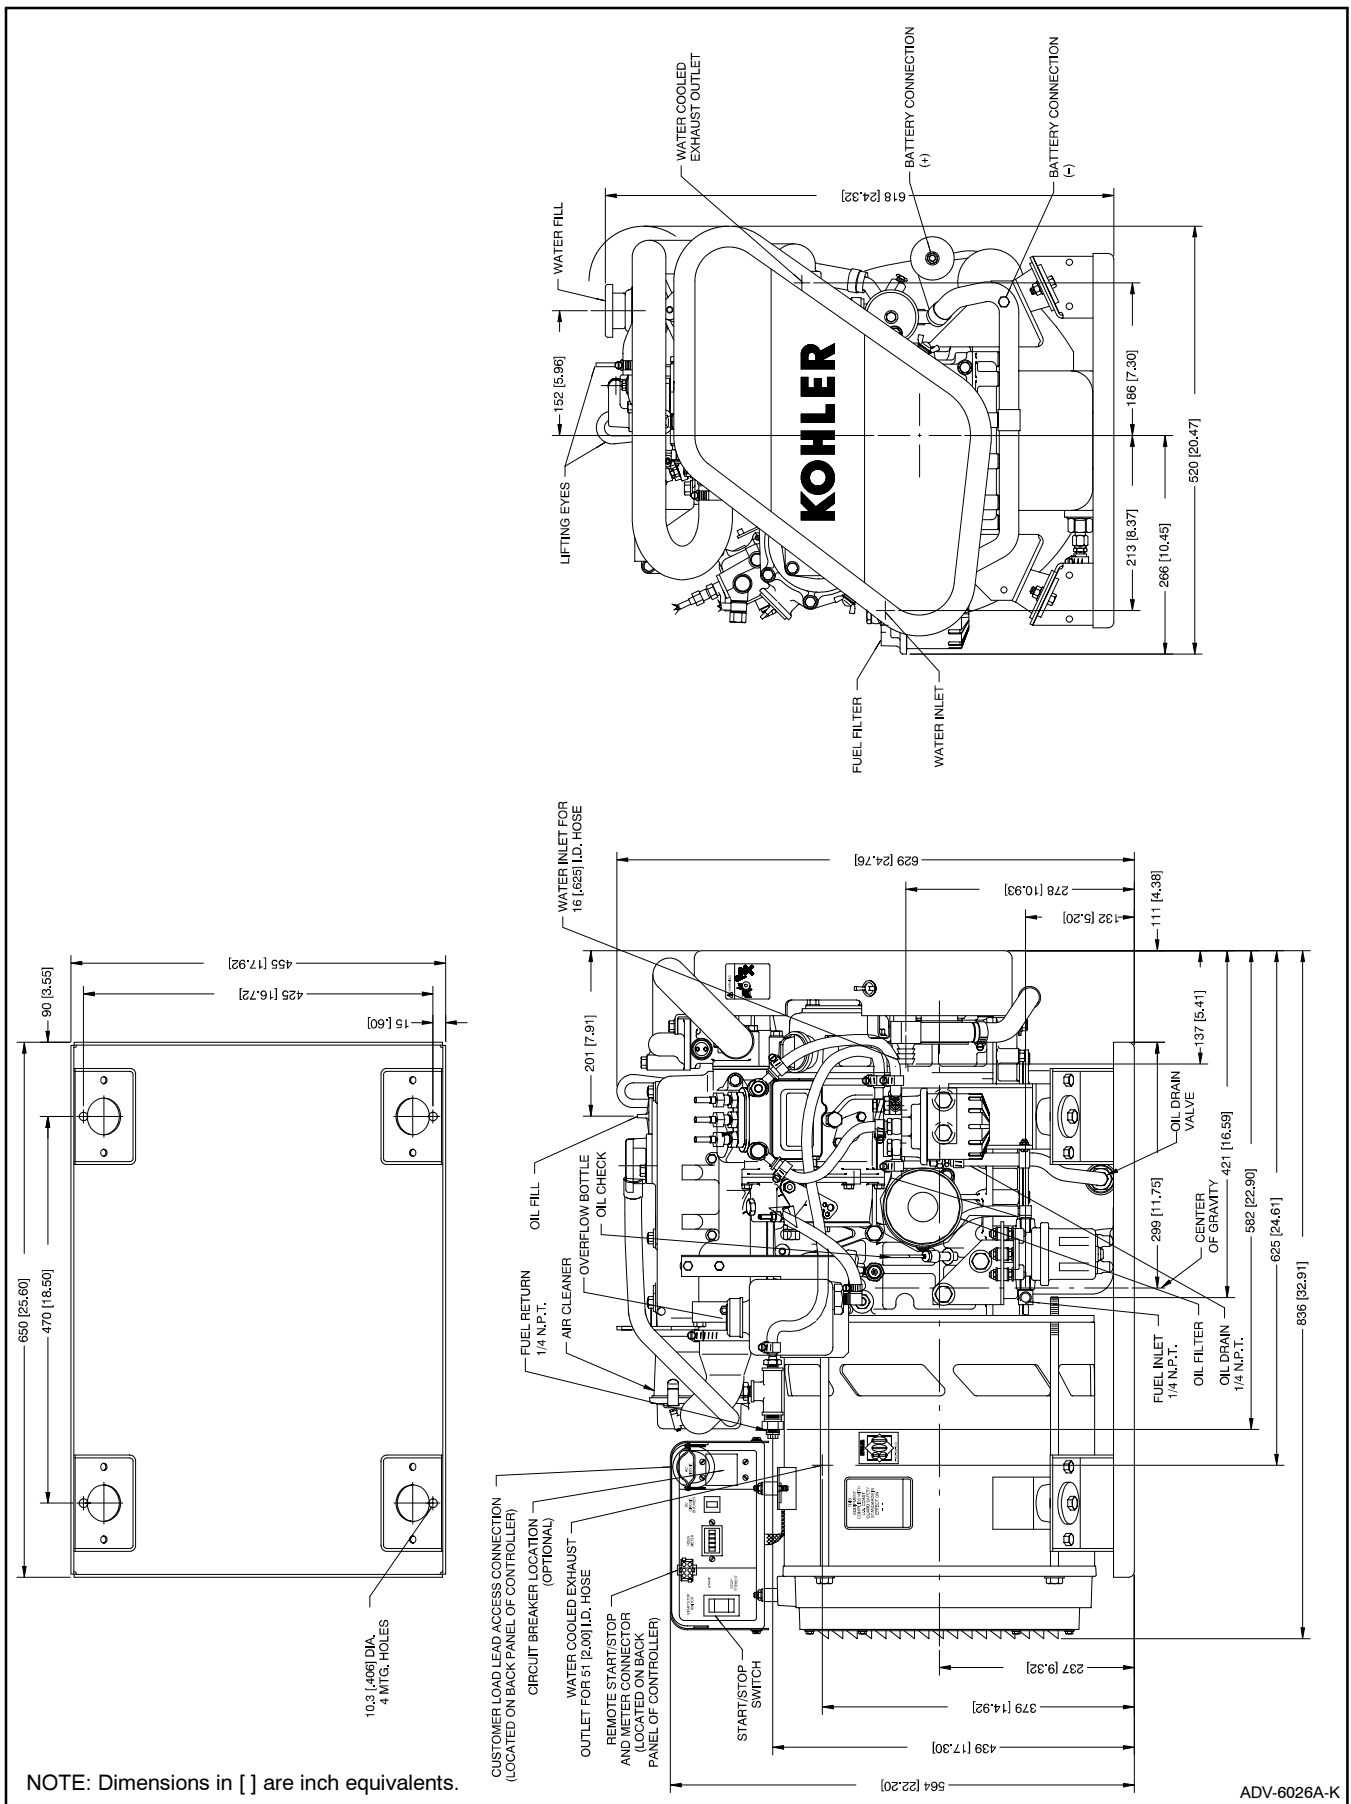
Dimension Drawing, 8.5/9EFOZ and 10EOZ
